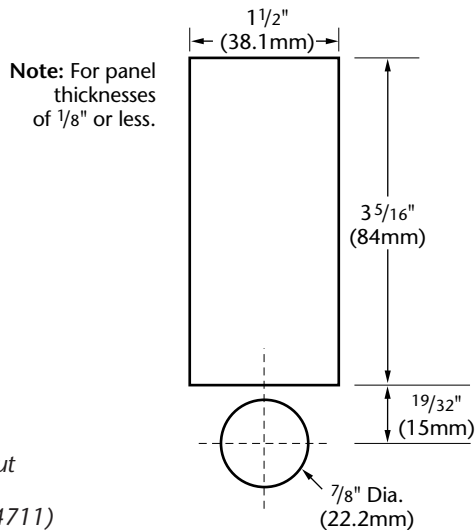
Panel Cutout Dimensions for Aluminum Bezel (FM4711)
